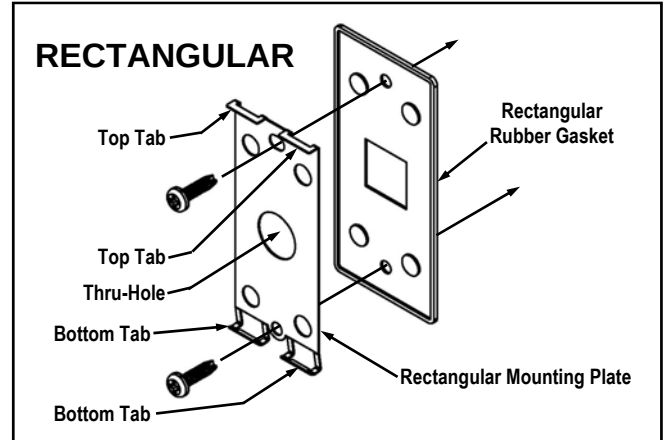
A: "RECTANGULAR MOUNTING PLATE" AND THE ATTACHED "RECTANGULAR RUBBER GASKET"
